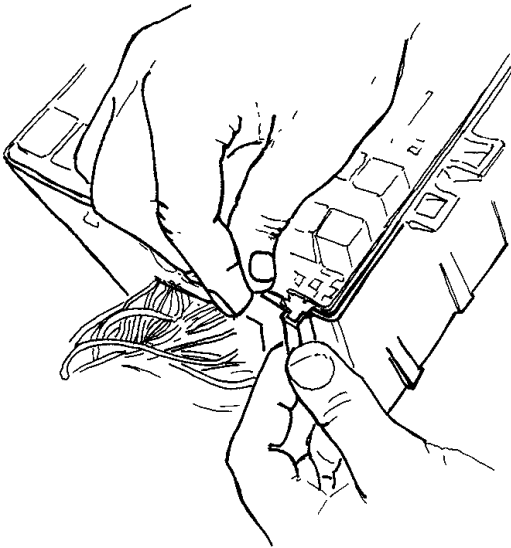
Remove P.D.C. Fuse Block Box Side Door
